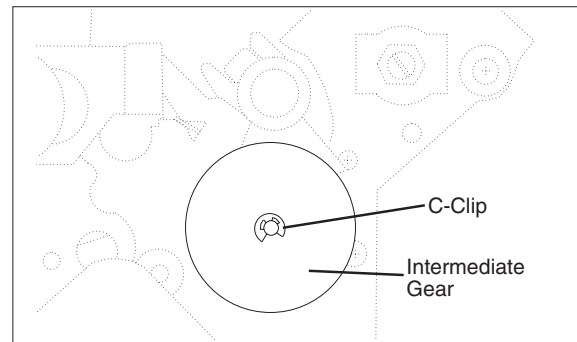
Intermediate Gear Retaining Clip. (Viewed From Left Side)
